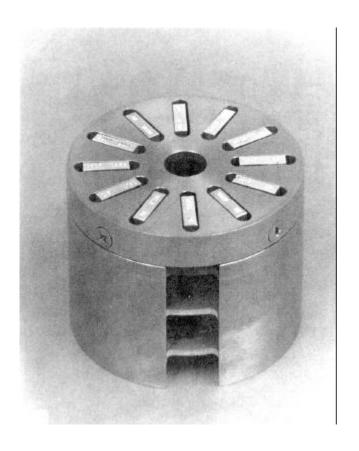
HOLDING FIXTURES FOR SUBCARRIER OSCILLATOR AND SIGNAL CONDITIONING BOARDS
